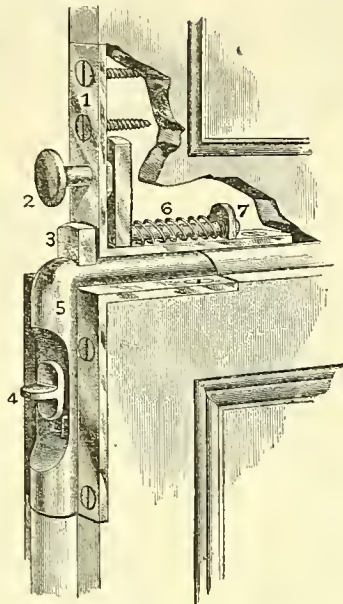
HEAD-BOARD BOLT AND BUSHING.
